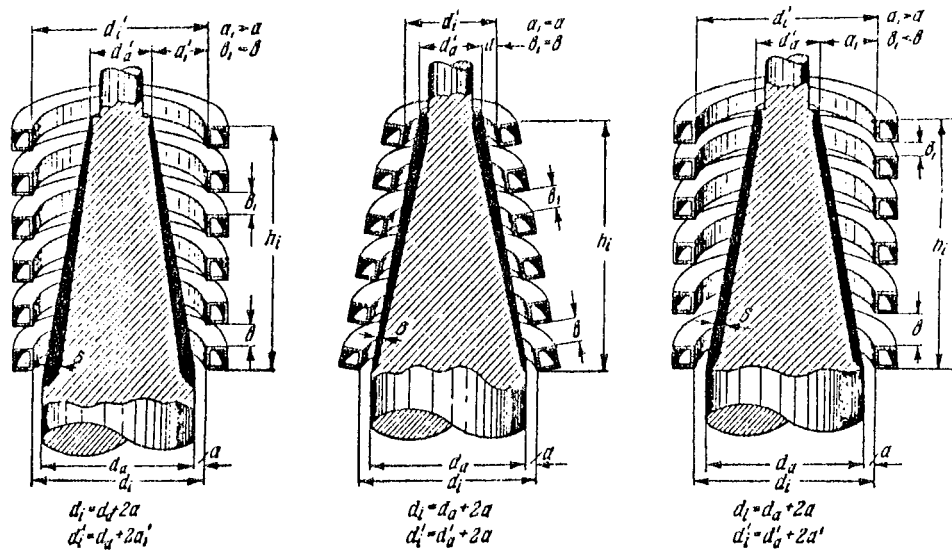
Coils for Hardening of Tapered Shafts [12].
